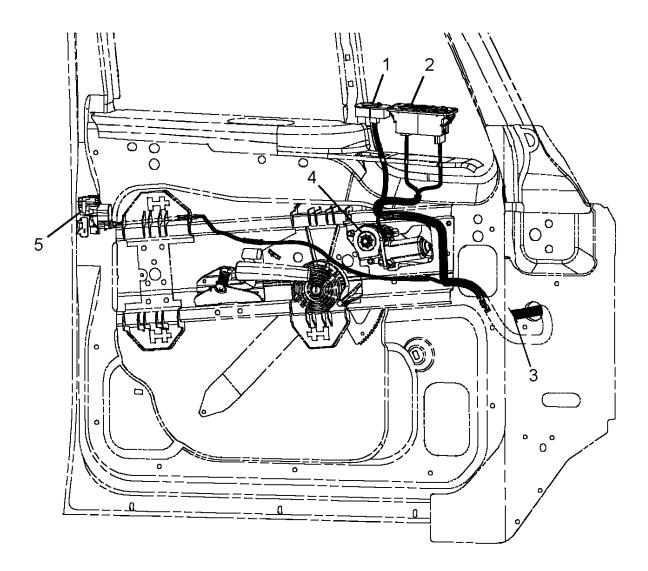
Power Window and Lock Wiring (Drivers Side Shown)
